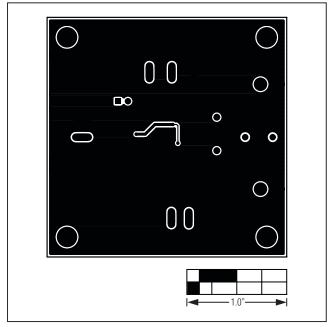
MAX97220A EV Kit PCB Layout—Solder Side
